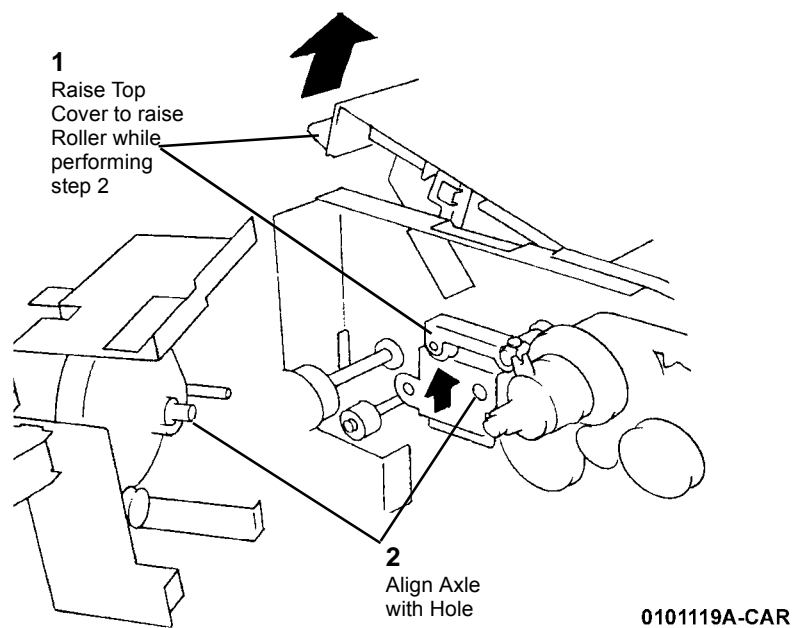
Inserting Axle of Cam Bracket Assembly into Hole
